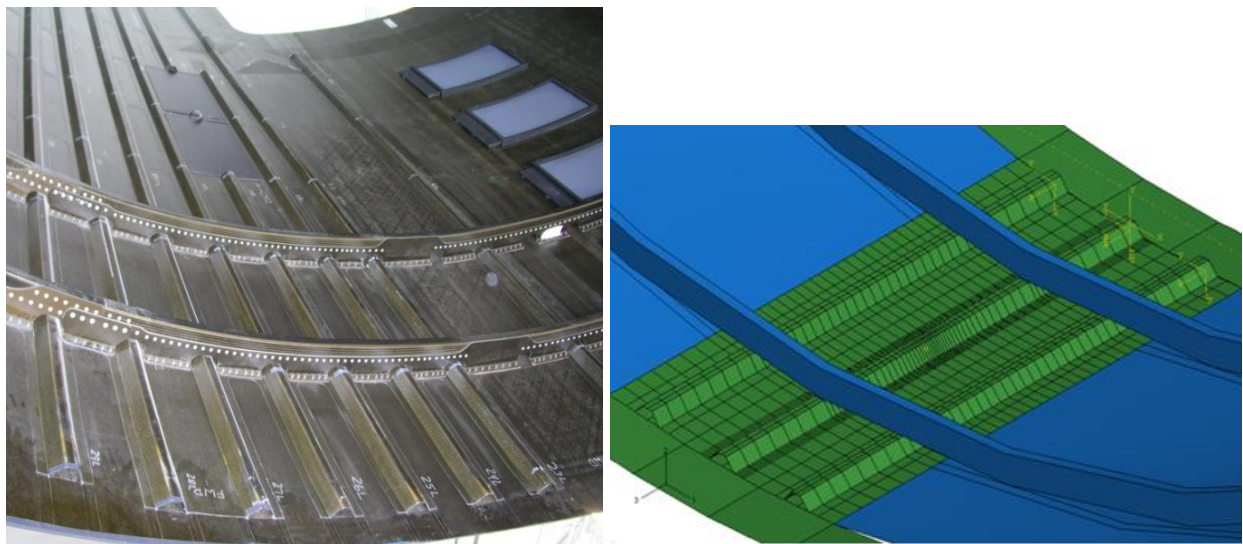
Skin-Stringer of a fuselage barrel section, fasteners visible on frames (left) and FEA (fasteners not modeled)
